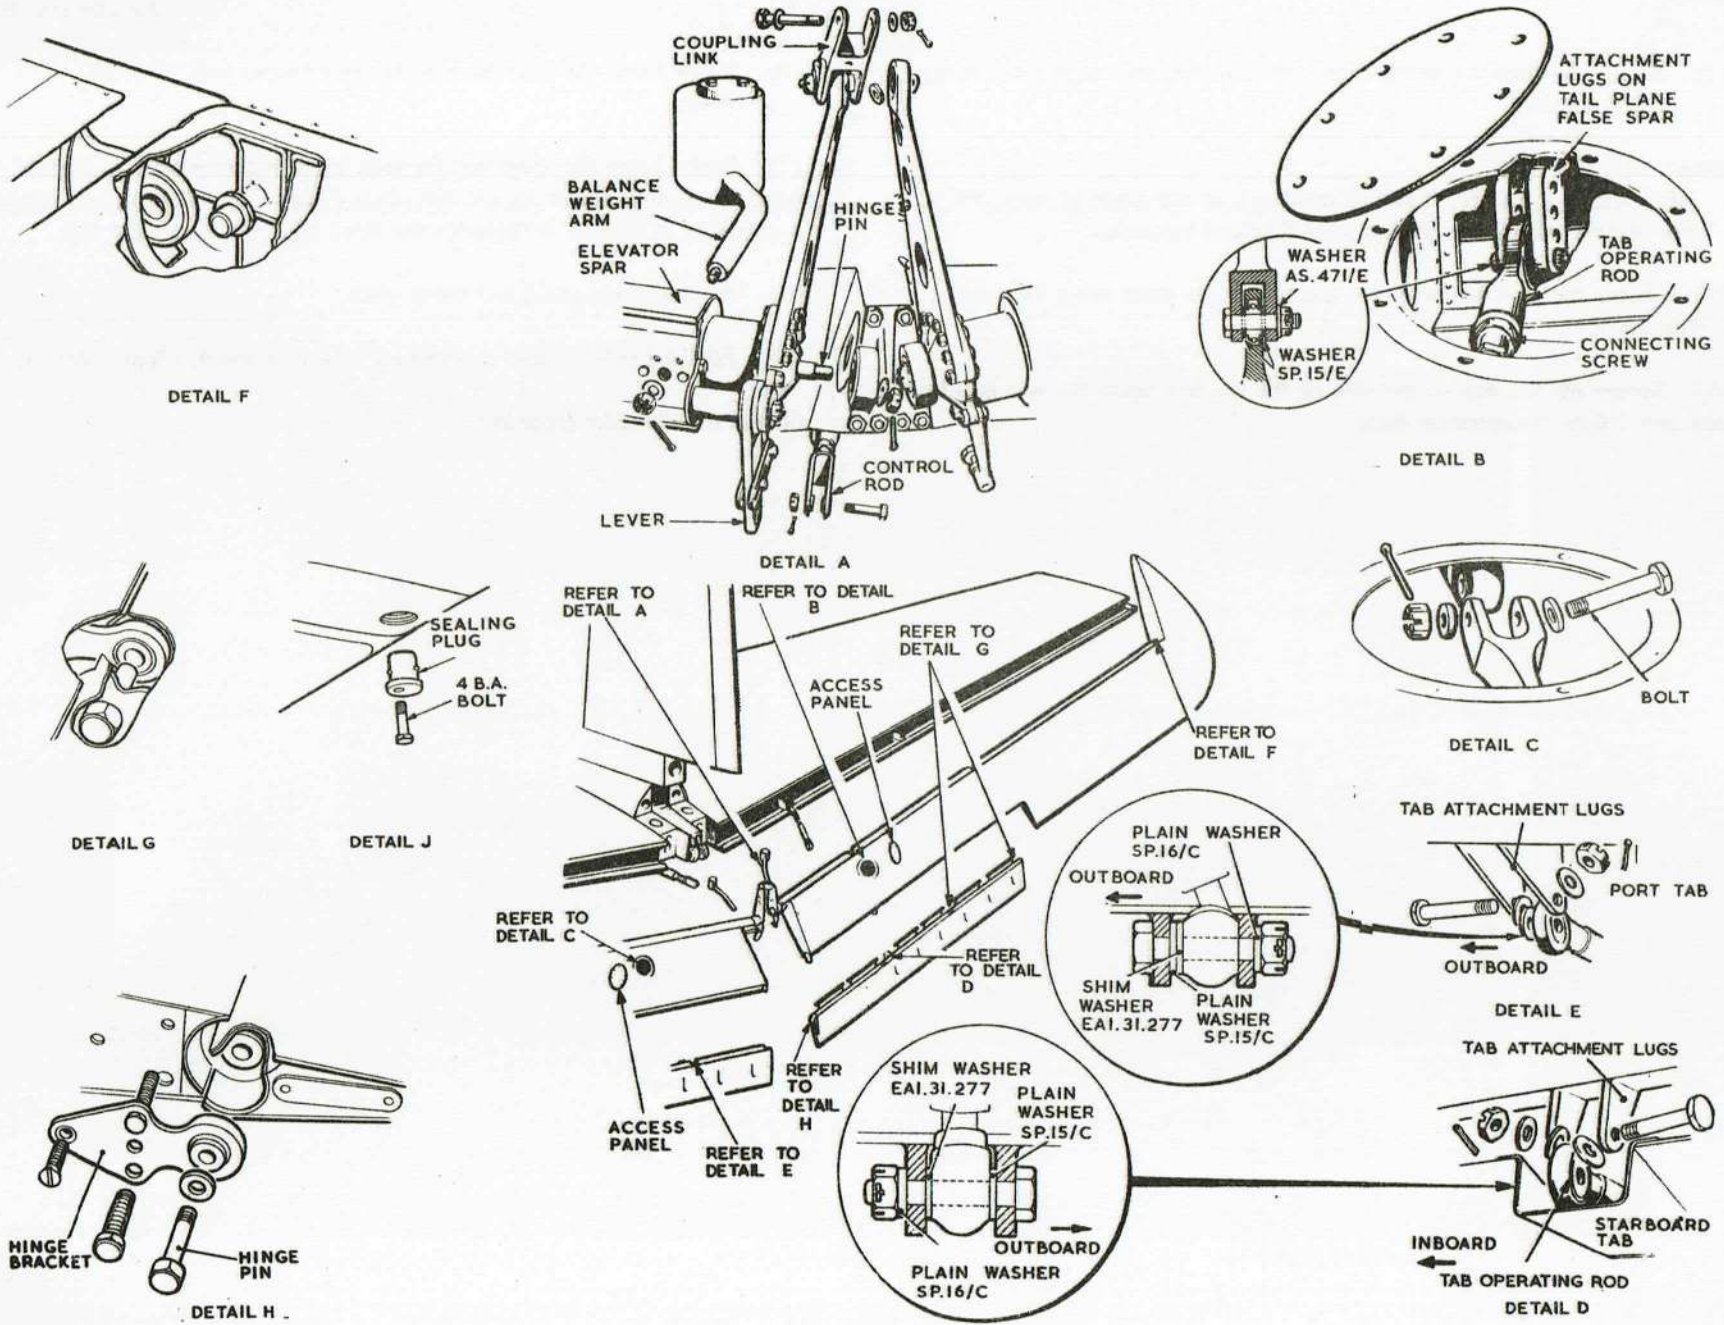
ELEVATOR AND ELEVATOR TAB REMOVAL
